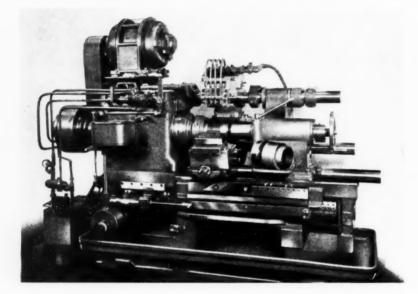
After Finish-turning the Outside Diameter of the Barrel on a Fay Automatic (Not Shown), the Cooling Fins on the Cylinder Barrel are Machined as Indicated in This Illustration
